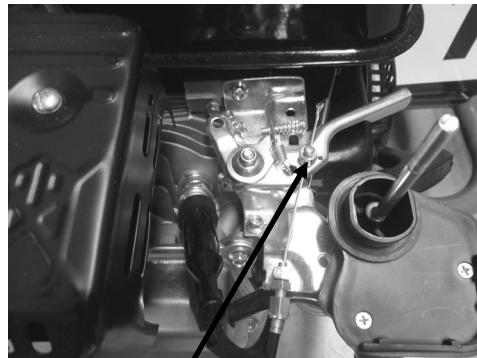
Position of Throttle cable on motor. Remove air filter to attach.
